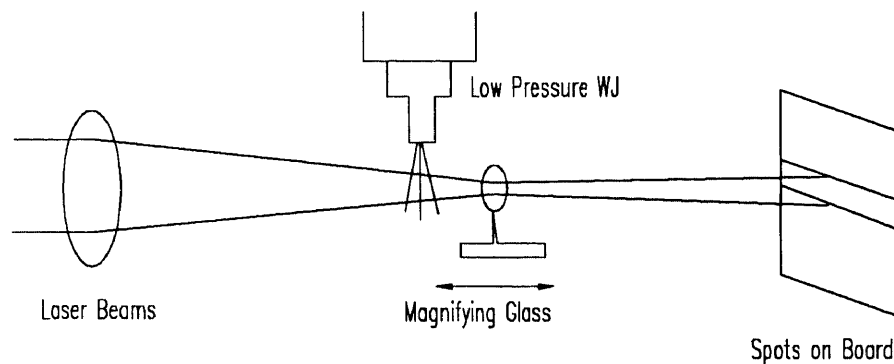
Checking of Jet Alignment with LTA Focusing Spots
